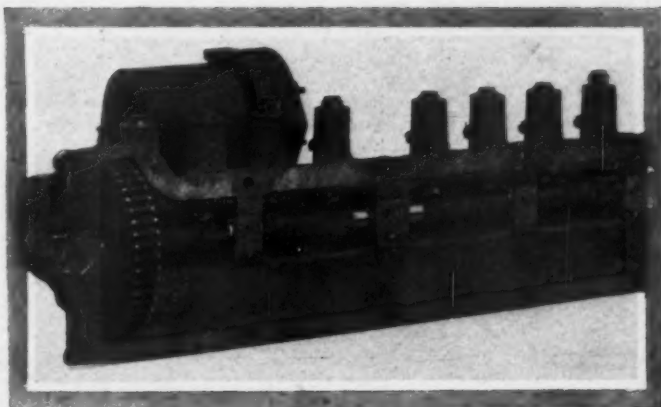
Camshaft, indicating how it is placed in a separable part of the case and can be removed, with its gear, at will
